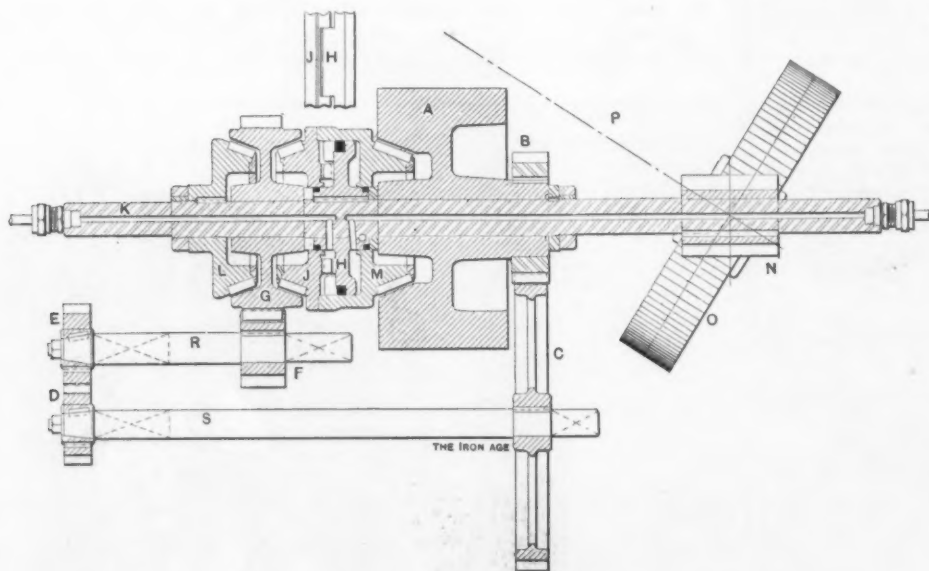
Sectional View of the Driving and Reversing Mechanism of the Sellers Planer.
